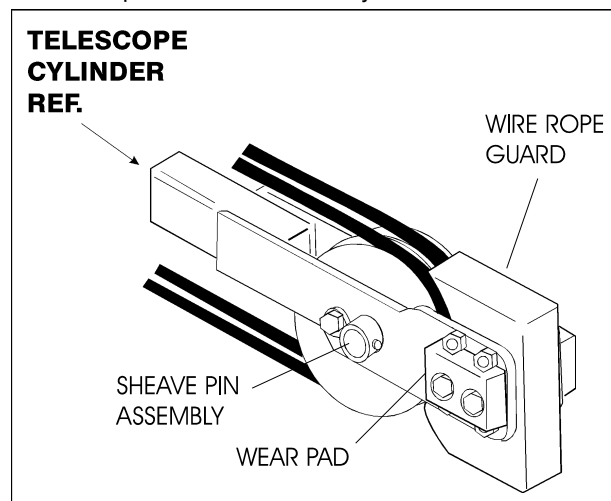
Boom Assembly Cutaway - Sheet 2 of 3
